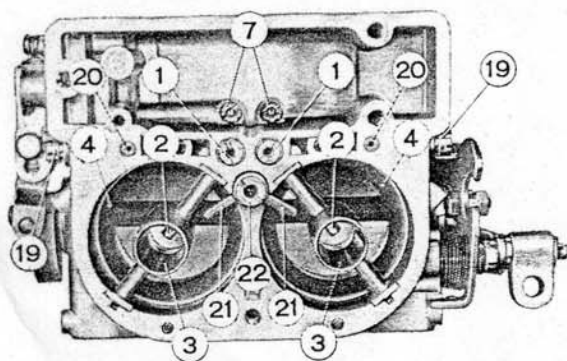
Weber 40 DCN 14 carburetor without cover.
